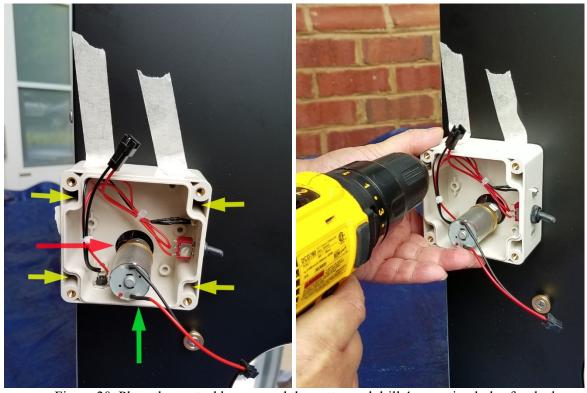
Place the control box around the motor and drill 4 mounting holes for the box.
